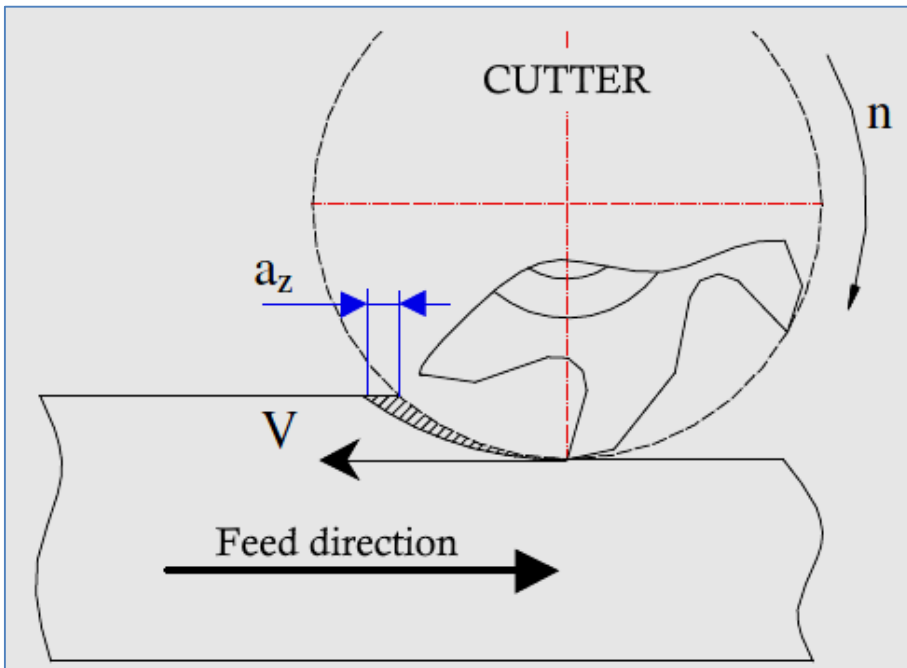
Relative movement between cutter and workpiece with discordant feed direction
